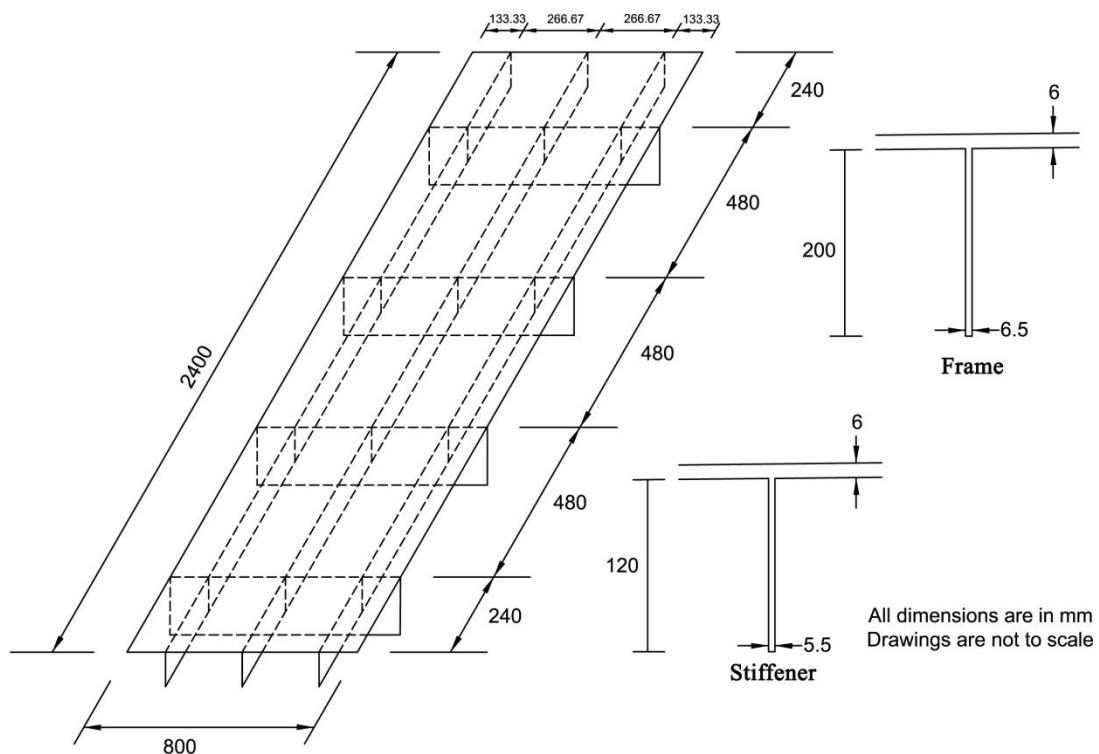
Geometry and dimensions of stiffened panel assumed for investigation
